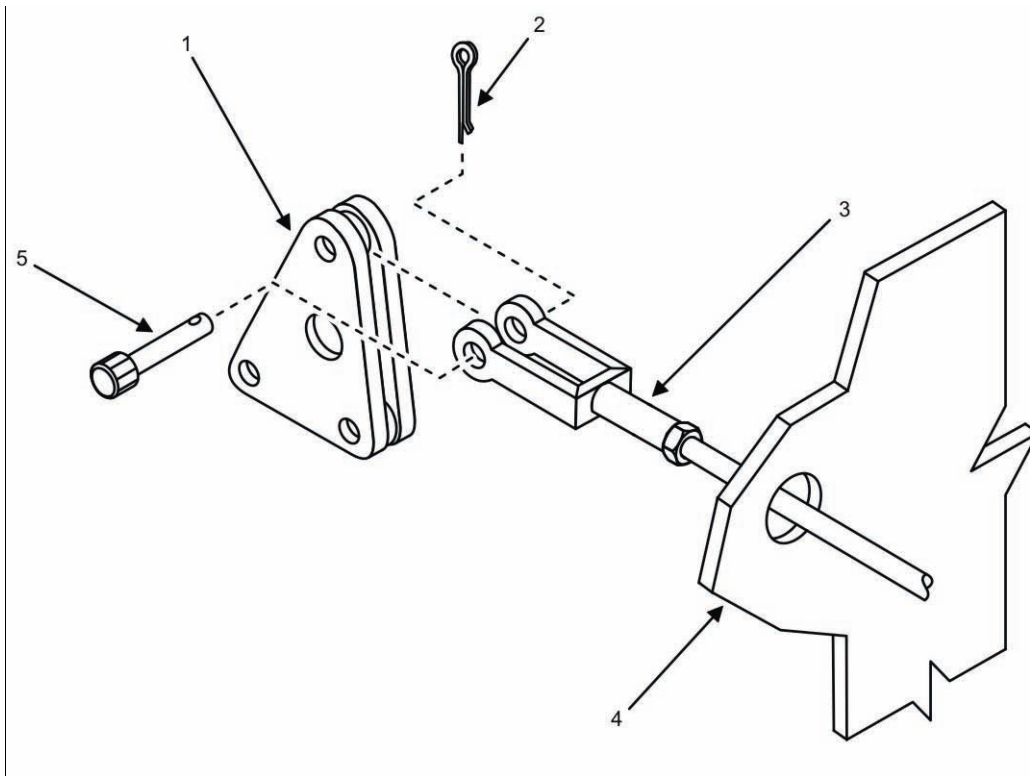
Brake Cable Connection to Hand Brake — Detail.
